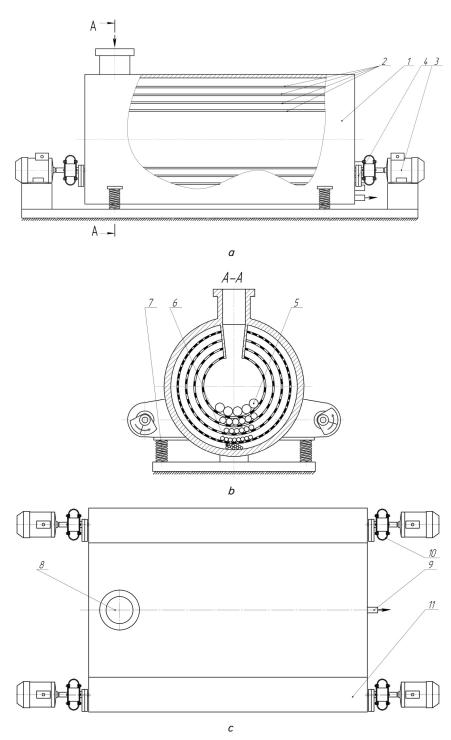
Vibratory separator of the drum type with concentric arrangement of sieves and four debalances that have an independent drive: a - vibratory separator - main view; b - vibratory separator - side view (cross-section); c - vibratory separator - top view
